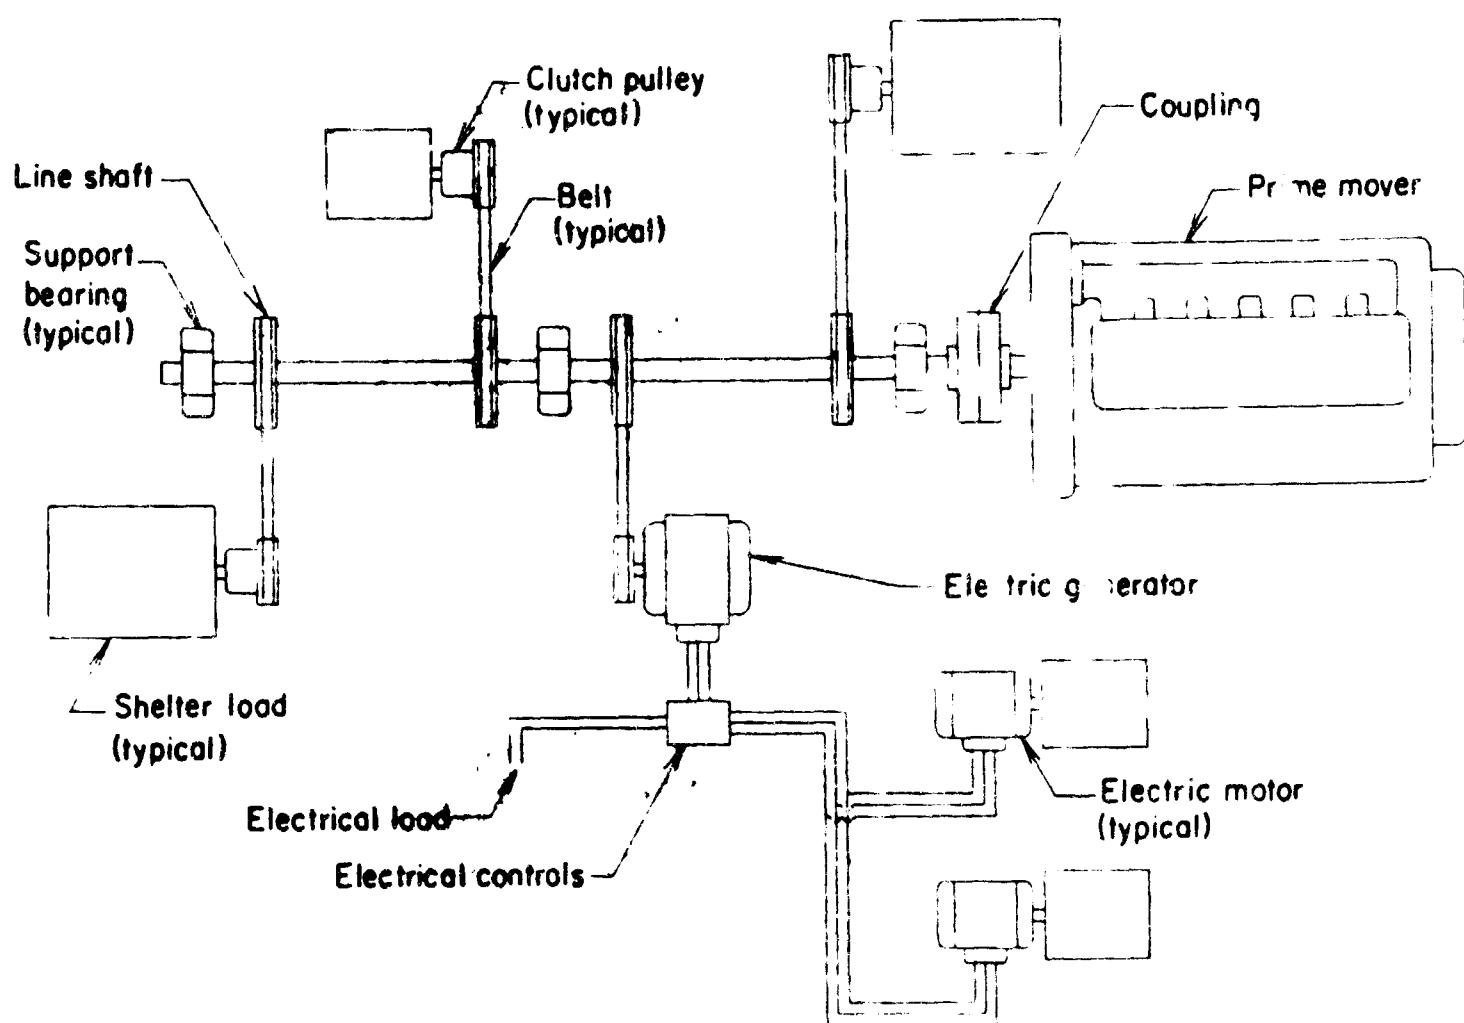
SINGLE-PRIME-MOVER MECHANICAL POWER-TRANSMISSION SYSTEM
